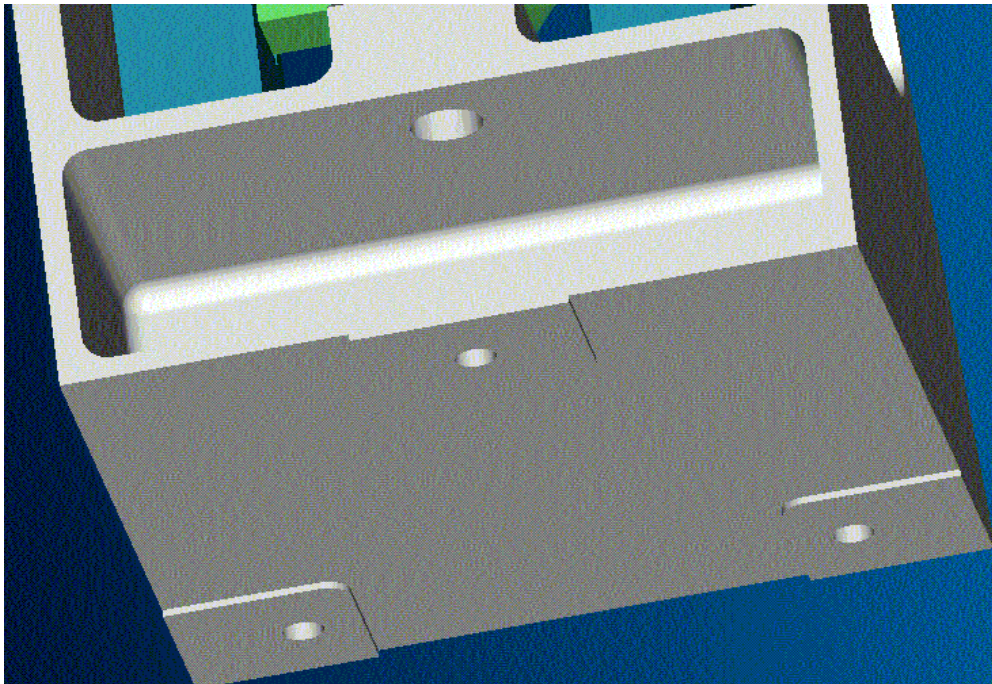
Additional 3D view of BSM, showing mounting surface on underside. This interfaces to the proposed mounting 'shoe'
